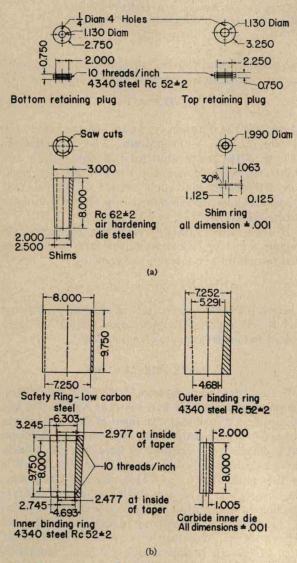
(a) and (b), high-pressure vessel component parts shown in partial cross section. Safety ring, outer binding ring, inner binding ring, shims, and die are assembled successively in a hydraulic press. Shim rings are then introduced between both screw-in retaining rings and die.
